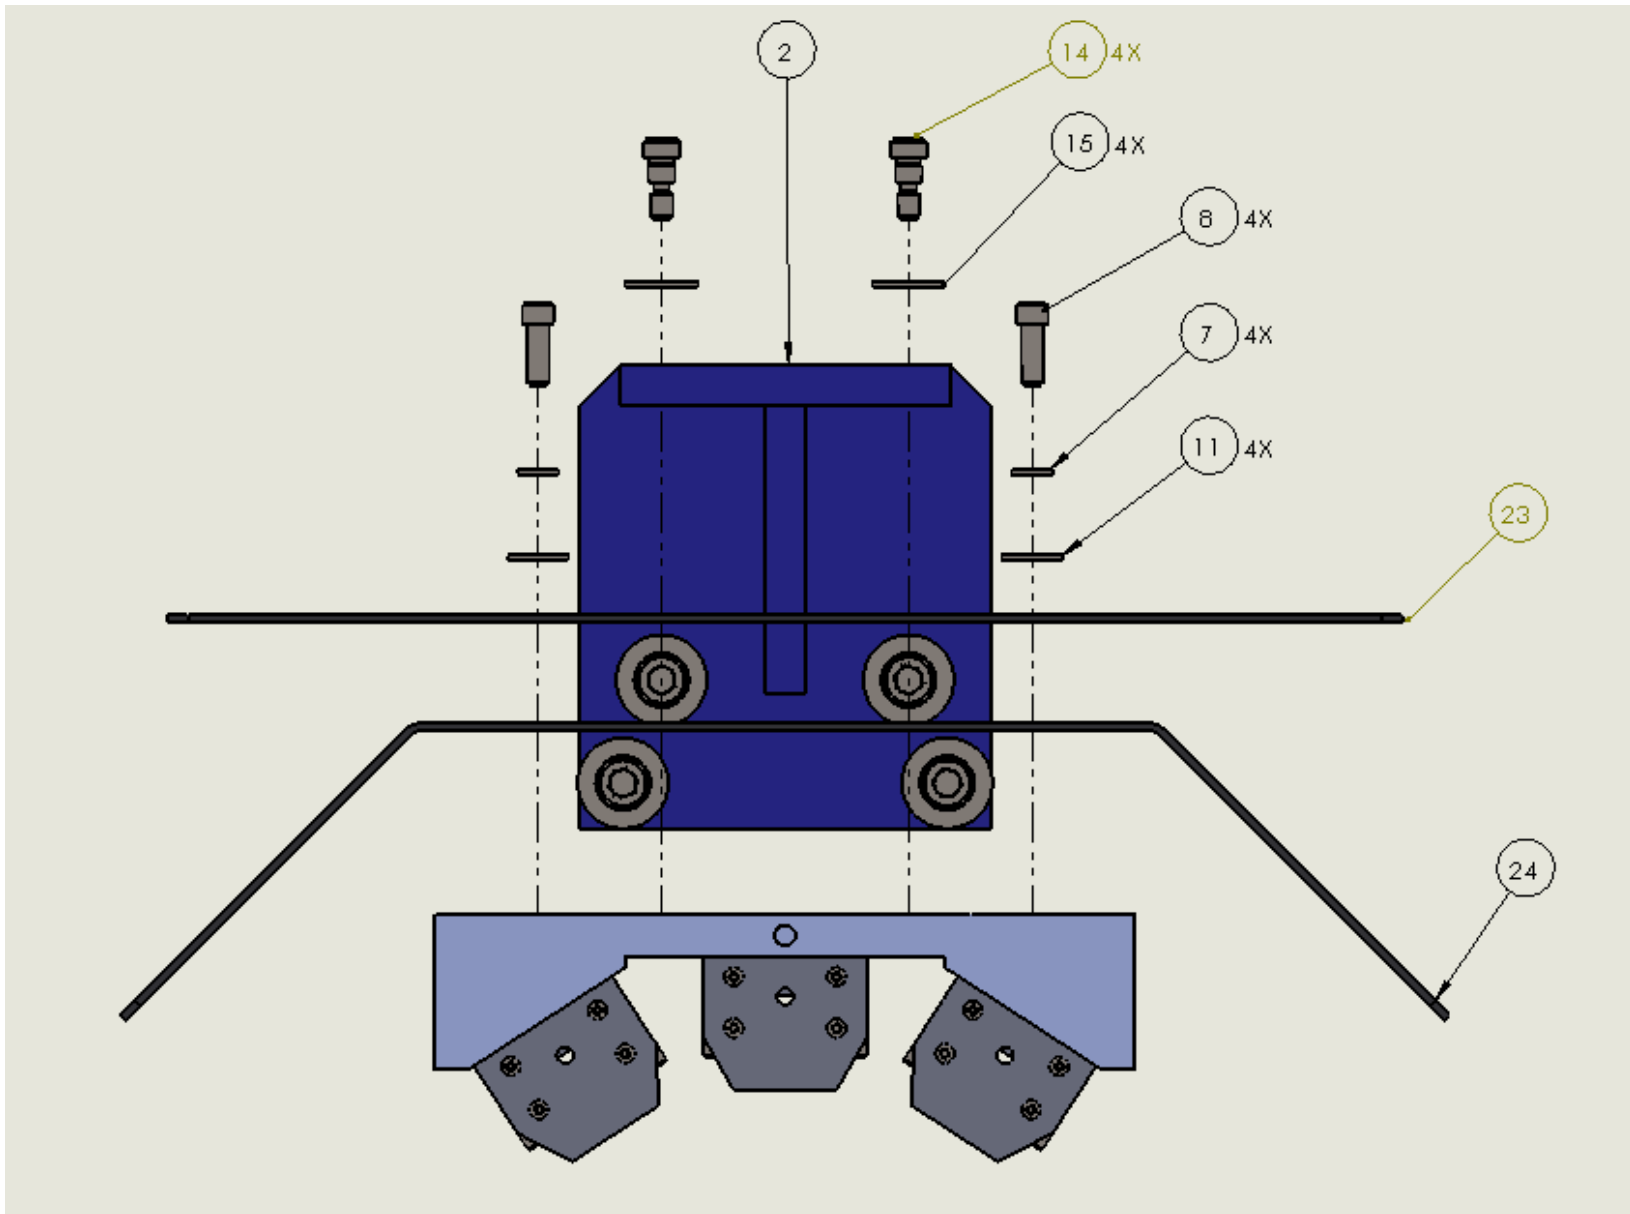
Assembly of 202007 block onto upper bracket with heat sinks
